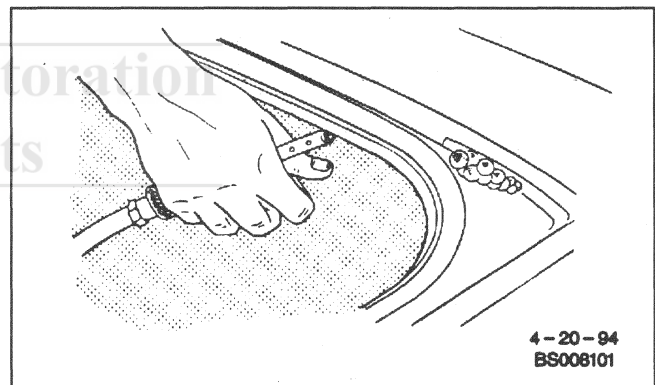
Air Hose and Bubble Solution Test of Panel Joints
